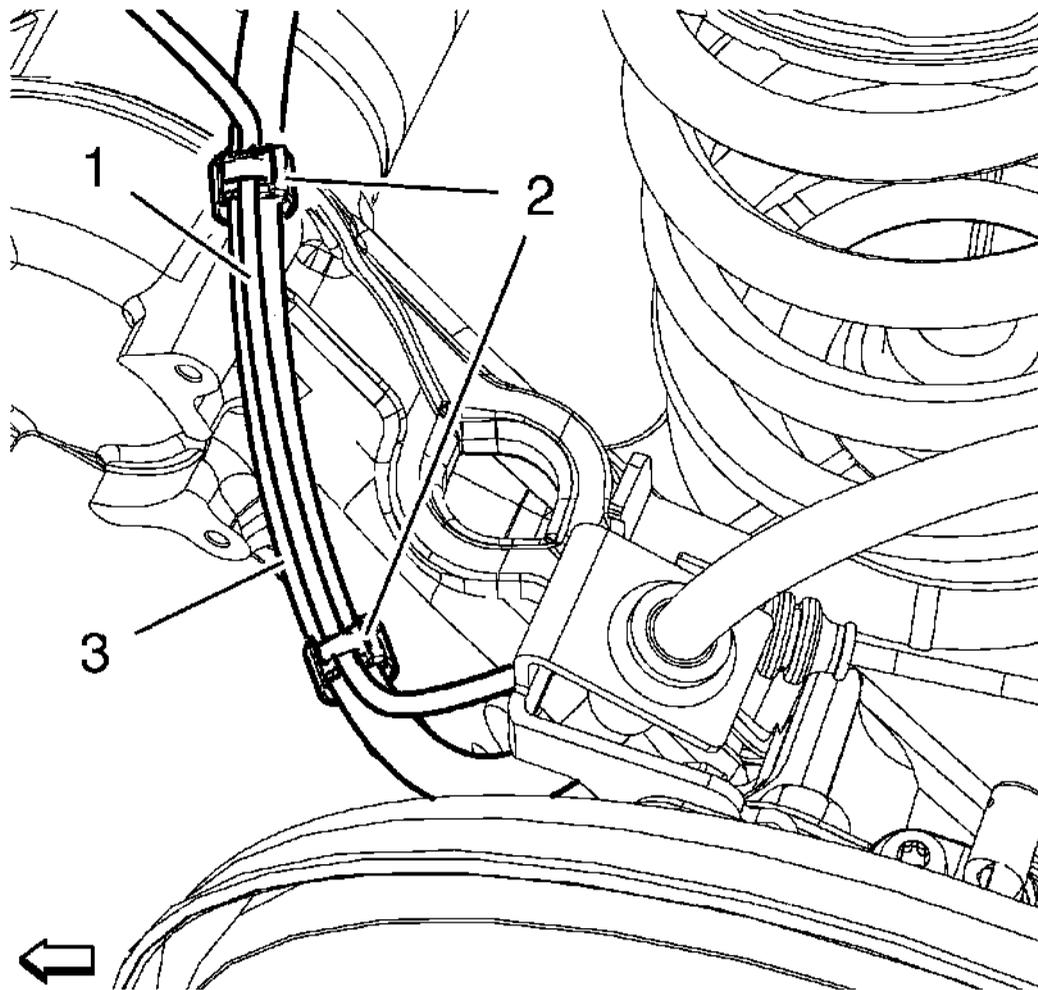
Wheel Speed Sensor Wiring Harness Retainers
